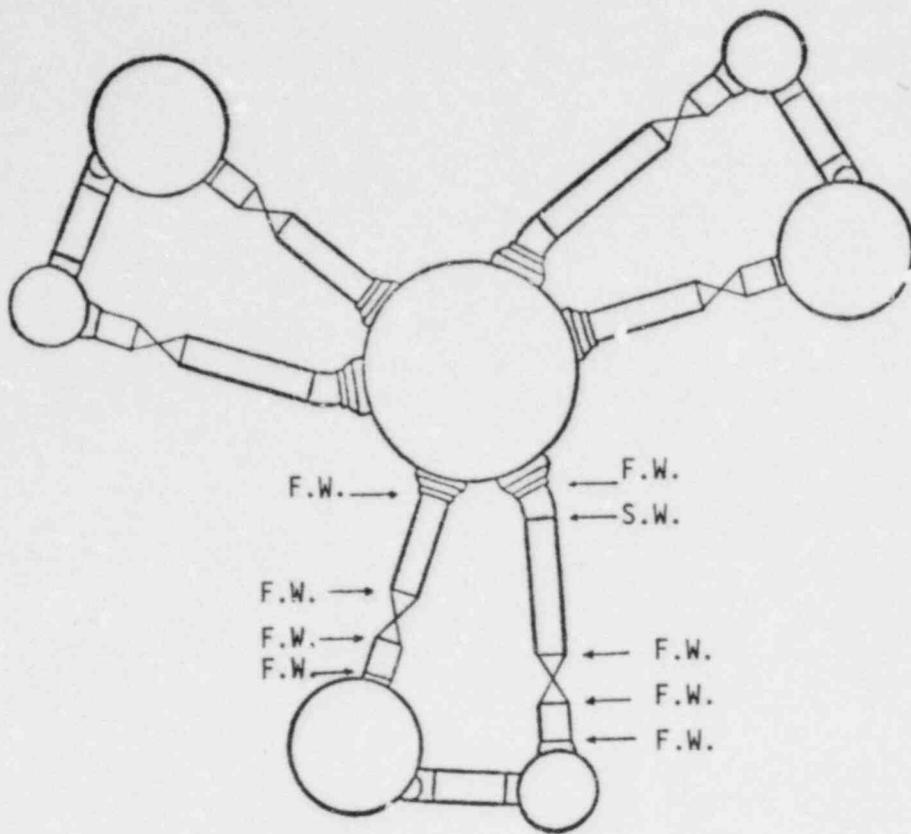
Weld location for Surry Units 1 and 2
